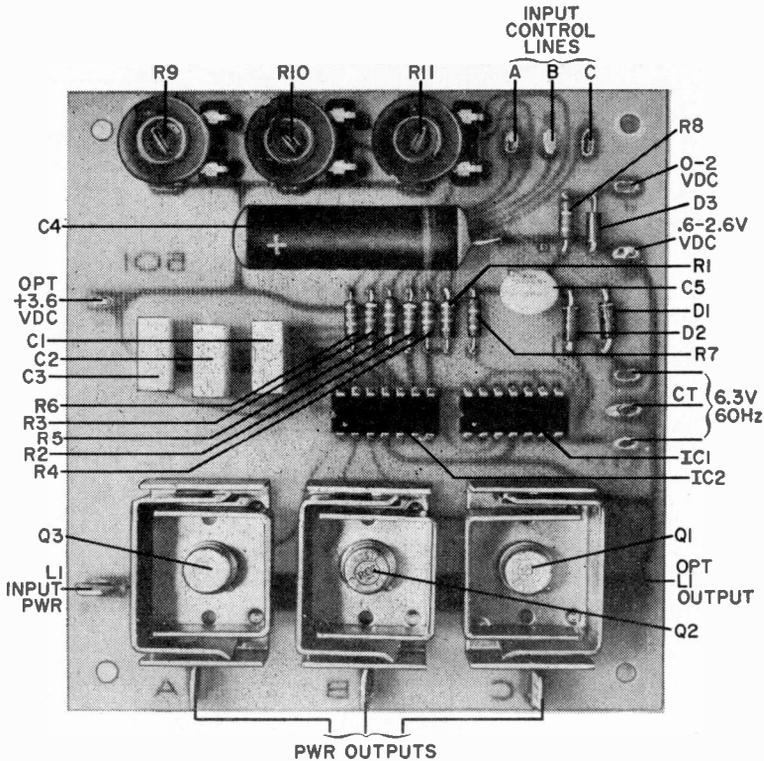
To install the components, follow the arrangement shown here. Soldered-in, slip-on power terminals are to be used for the output.
